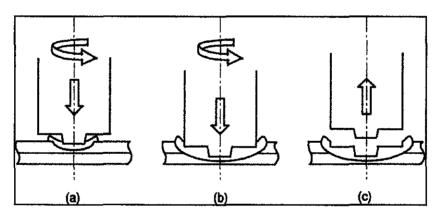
Schematic illustrations of friction stir spot welding process: (a) plunging; (b) bonding; (c) drawing out^[7]
